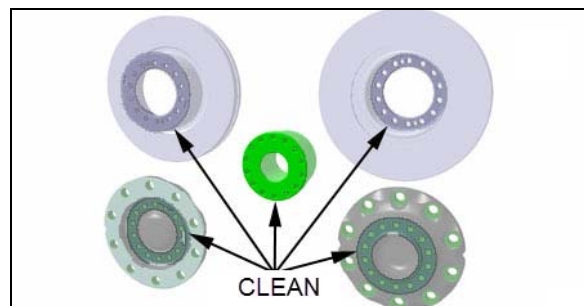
CLEANING HUB BEARING, ROTOR AND HUB FLANGE CLAMPING SURFACES
